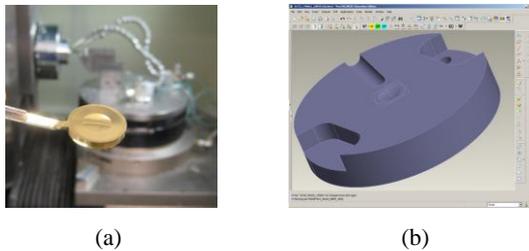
(a) Injection moulded part and (b) the lens cavity insert.
